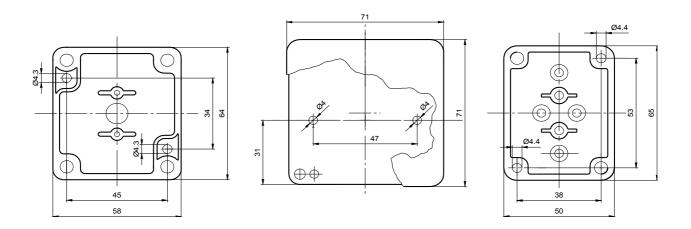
Dimension and spacing of mounting holes in casings of sensors to be fixed directly on a wall of a room/unit
